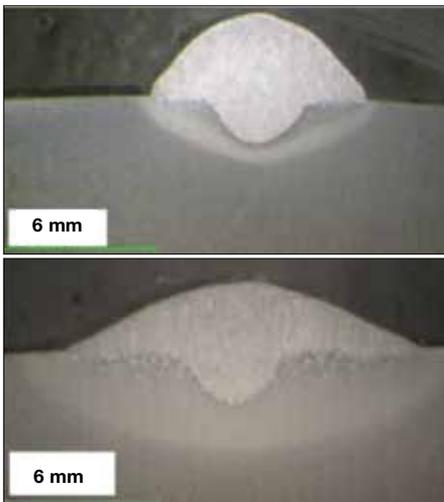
Comparison of welds with and without laser assistance. (top) Macrographs of a GMAW weld at 5 m/min wire feed speed and (bottom) the laser assisted weld. For the latter weld a laser power of 6 kW in a spot of 20 mm diameter was located at a process distance of 20 mm
